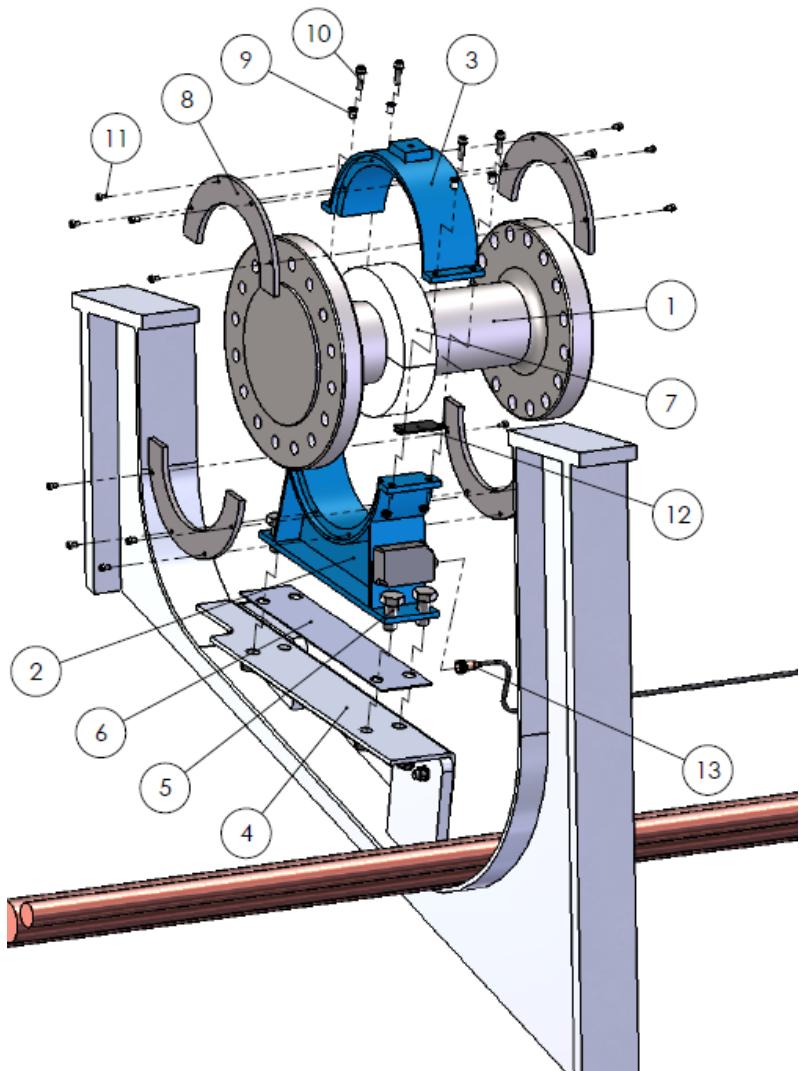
Exploded diagram of torsionmeter installation. Mounting plate arrangement and torsionmeter stator/rotor covers may vary between vessels. Refer to Table 1 for description of components.
